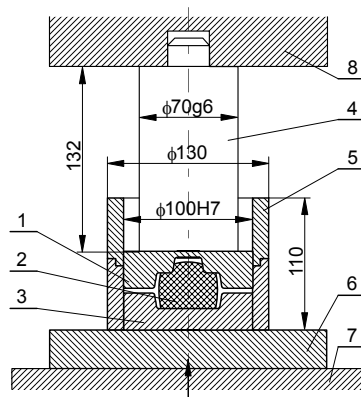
Fit of tool for deformation in open dies: 1 - upper die, 2 - lower die, 3 - working piece, 4 - punch, 5 - tube guide, 6 - flat plate, 7 - lower press table, 8 - hydraulic cylinder
